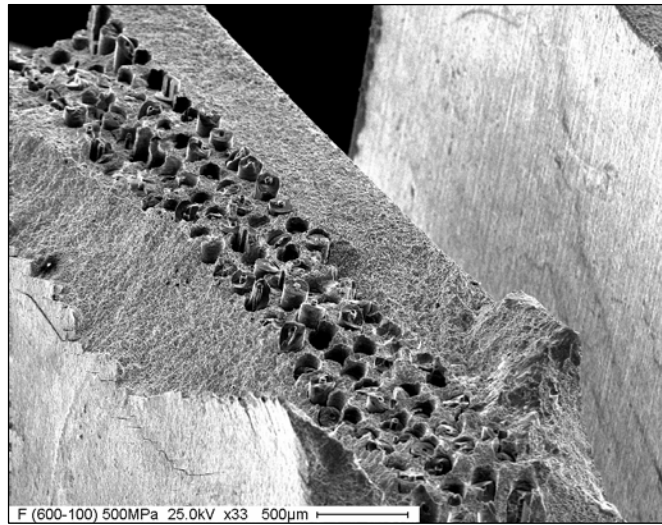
Fatigue fracture surface with heavy deformed matrix
